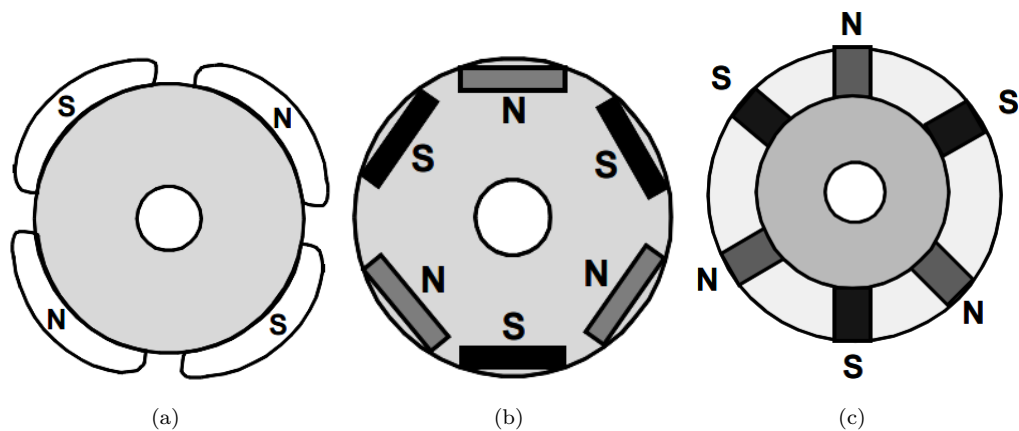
(a) Rotor with Circular Core and Magnets on the Periphery (b) Rotor with Circular Core and Embedded Magnets (c) Rotor with Circular Core and Rectangular Magnets Inserted into Rotor Core [2]
